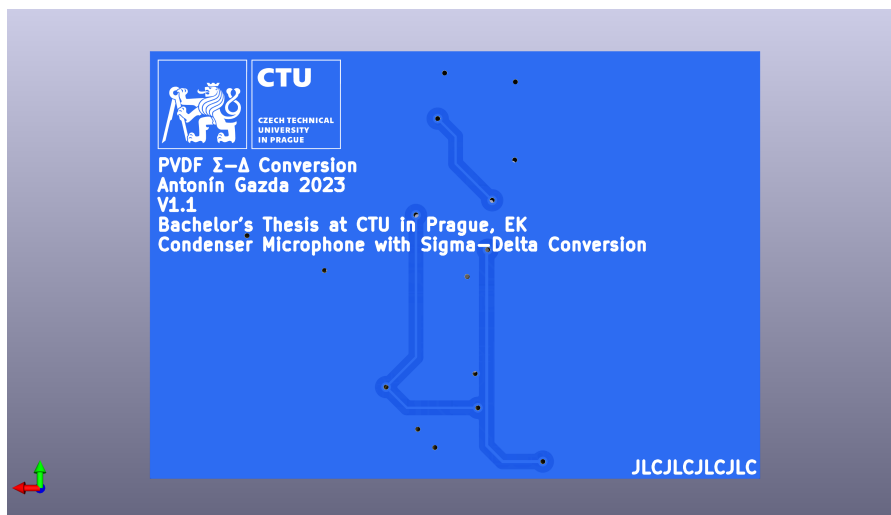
Bottom 3D view of the designed PVDF Sigma-Delta converter PCB with components
